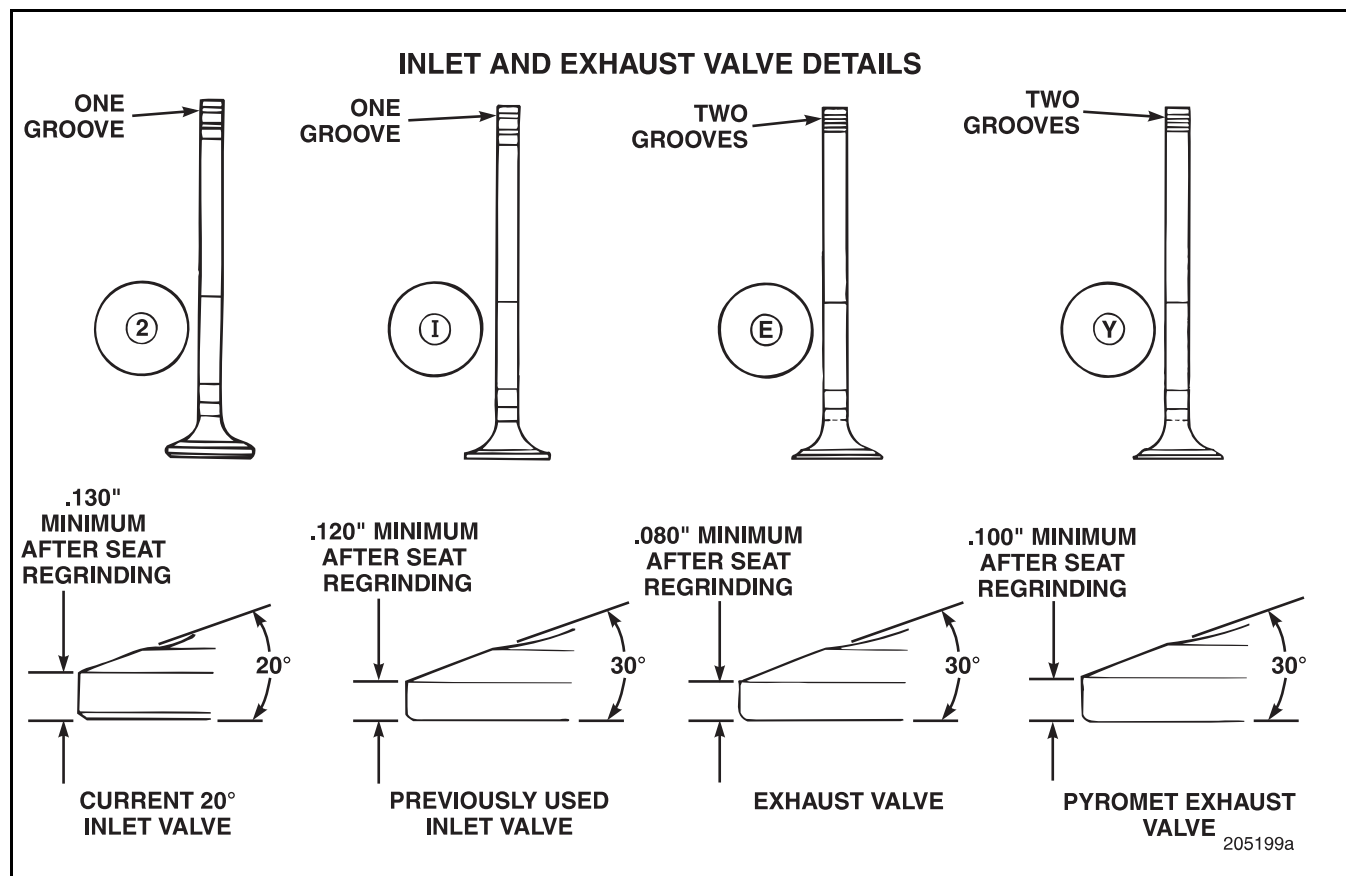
Valve Dimensions (Through September 1996 Production)
